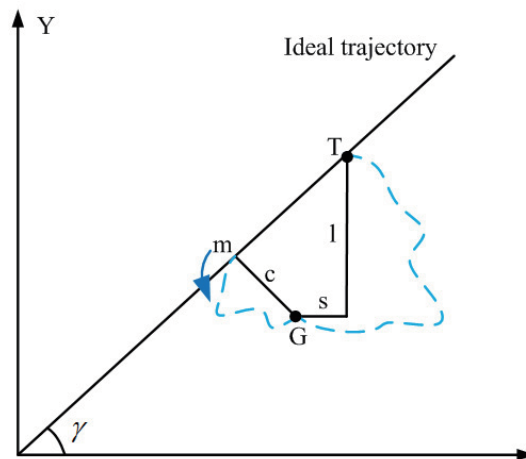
Schematic diagram of motion trajectory error of CNC machine tools
